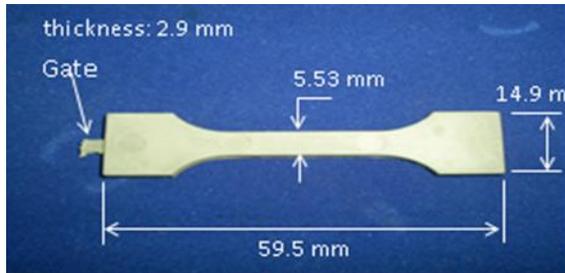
316L stainless steel specimen designs which was tested in transverse direction of axial fatigue testing
